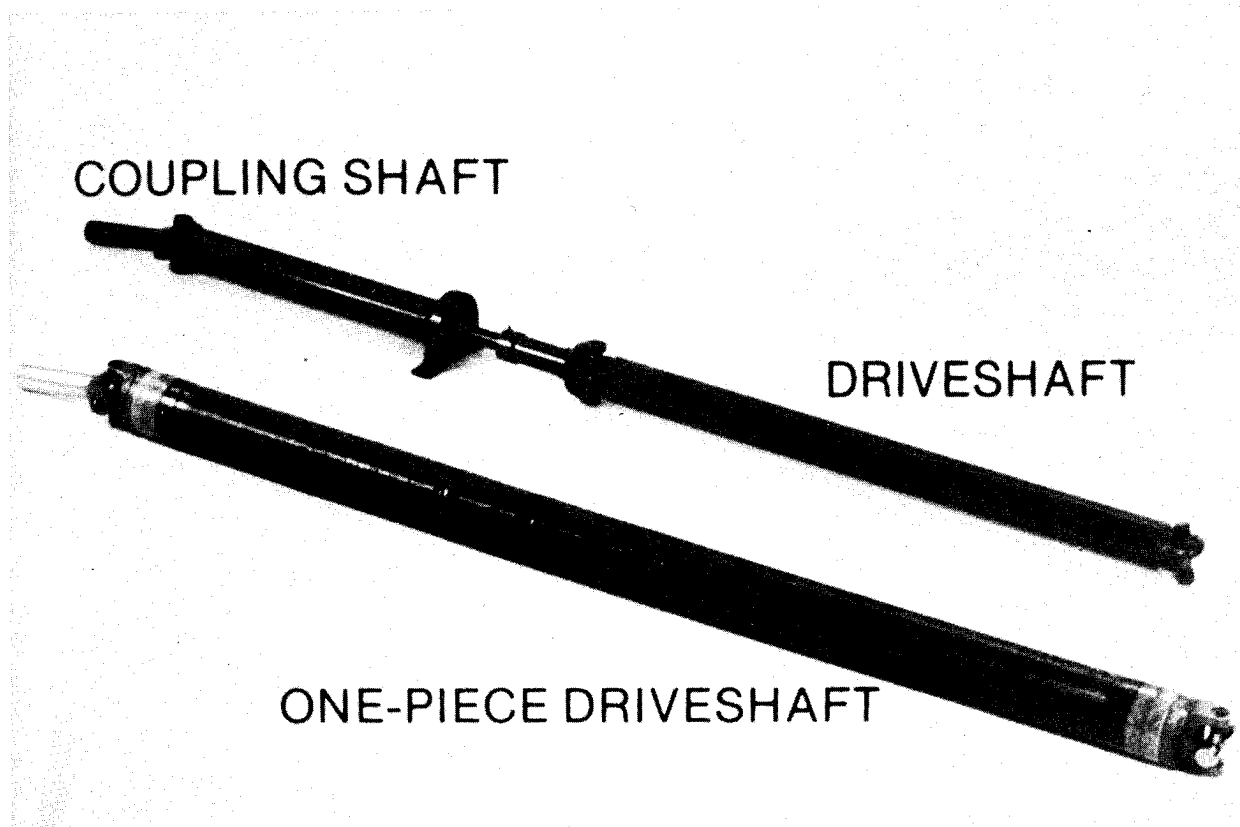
Automotive drive shafts (Courtesy of Hercules Inc.)
